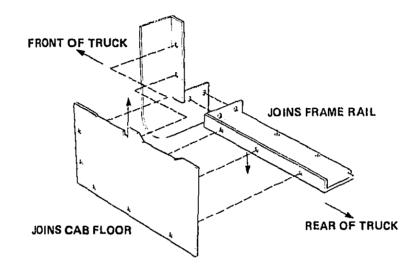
ASSEMBLY DRAWING OF LEFT GAP SHIELD.
